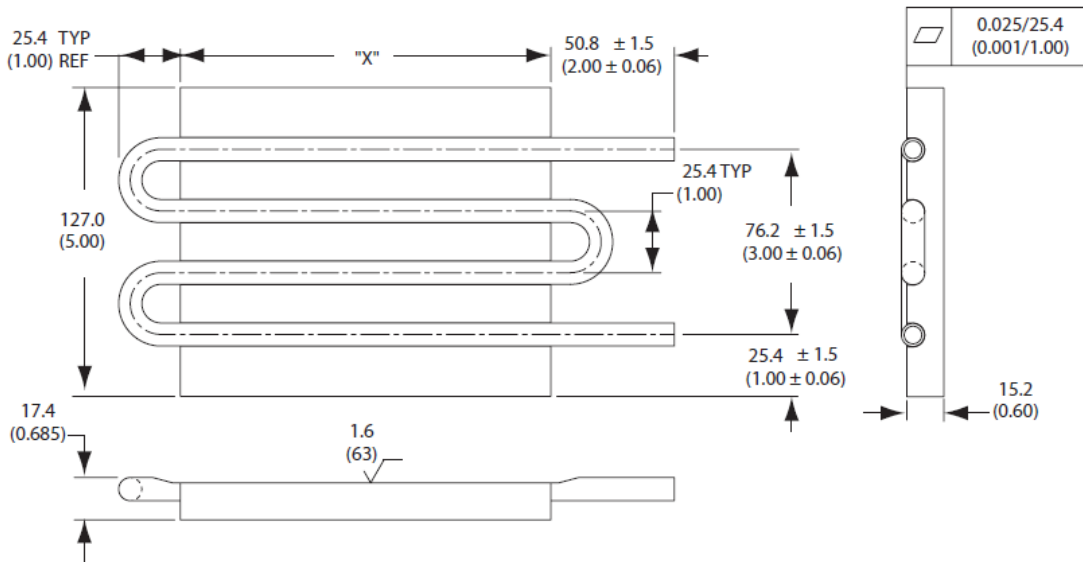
Technical drawing of Hi-Contact™ Liquid Cold Plate 4 Pass Model, dimensions as shown are mm (inches), “X” dimension refers to 152 mm (6”) or 305 mm (12”) in Figure D.2.
